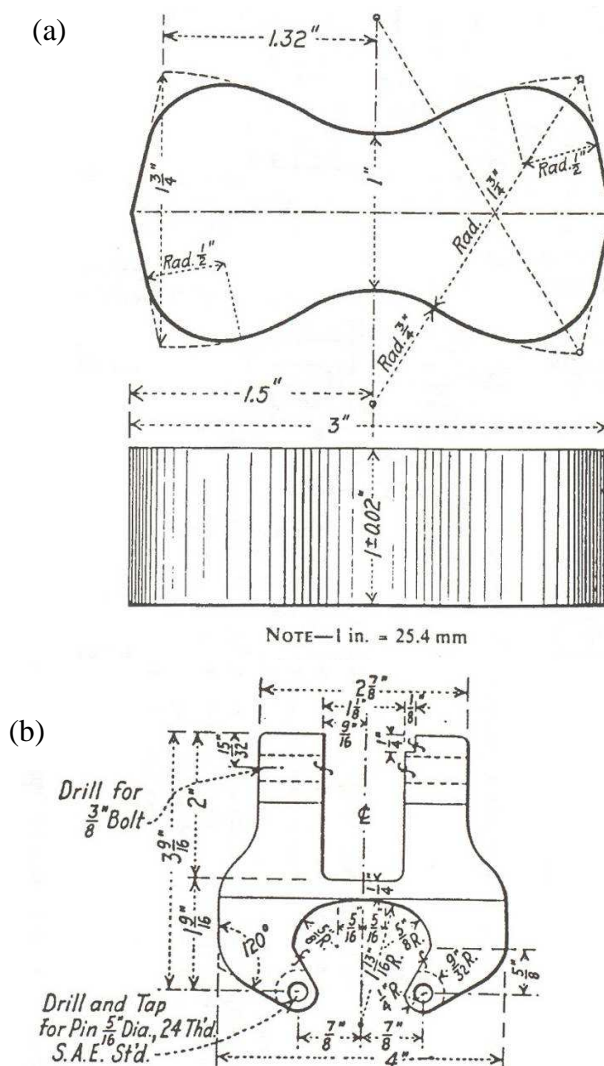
(a) dimensions of the mortar briquette test specimen and (b) clips for holding the mortar briquette test specimen [ASTM C190]
